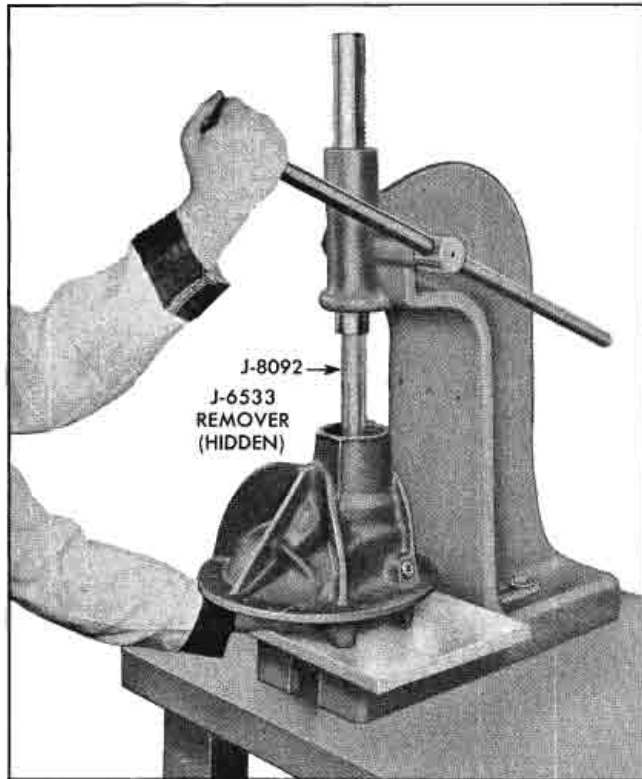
Removing Rear Bearing Outer Race with J-6533 and J-8092
